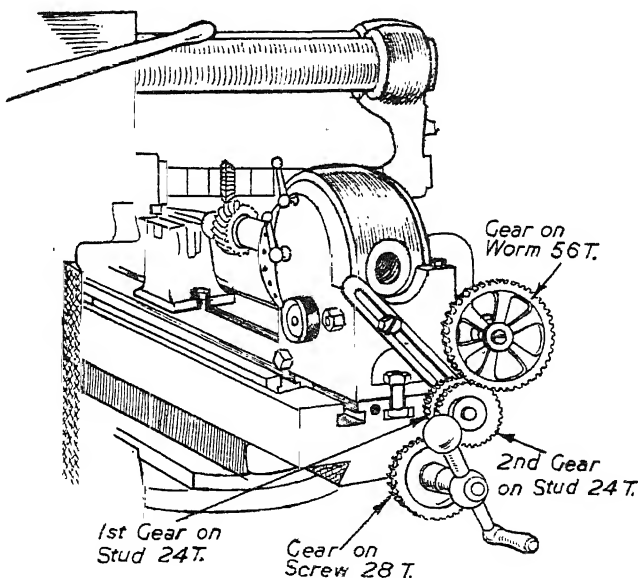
Set-up for cutting spiral of 20-in. lead.
